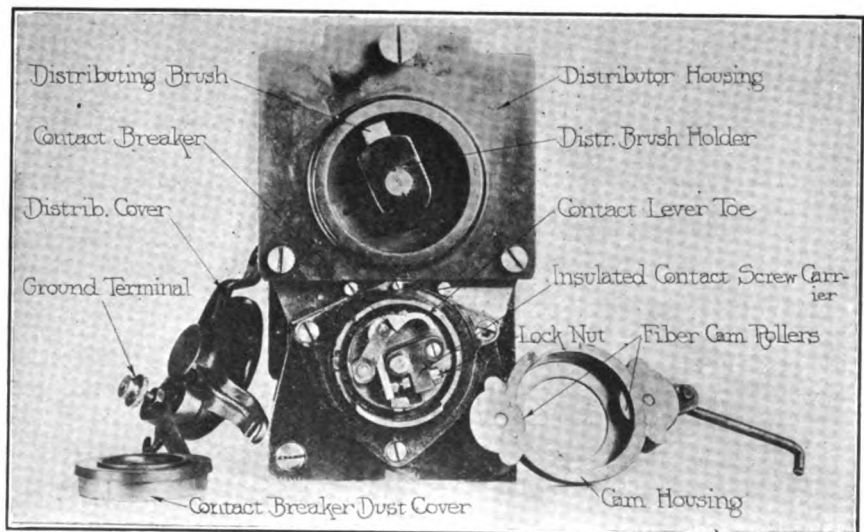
Distributor and Contact Breaker Mechanism of Bosch Magneto and Components Requiring Attention.
